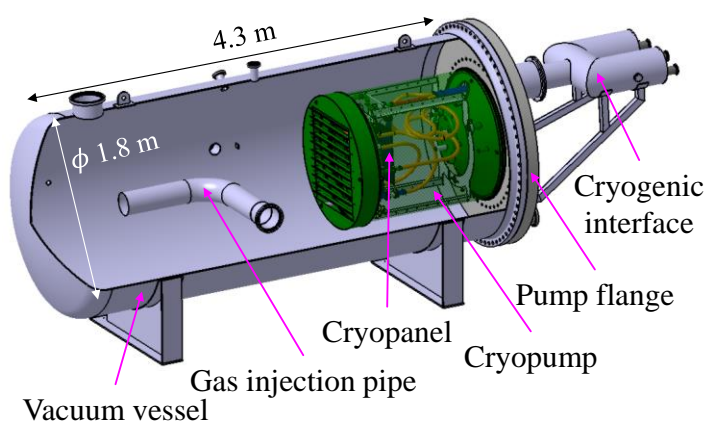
CAD view of the TIMO open panel pump installed inside the vacuum vessel.
